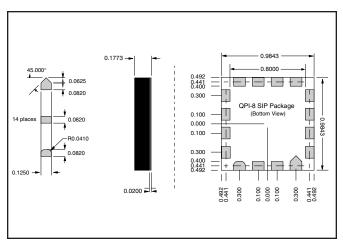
LGA Pad, package height and pad location dimensions in inches.
